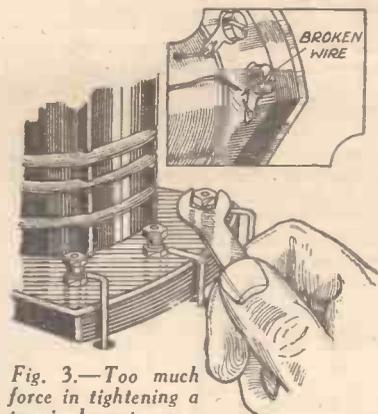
Too much force in tightening a terminal nut may cause the whole terminal to rotate and so break the connecting wire to the inside of the component.
